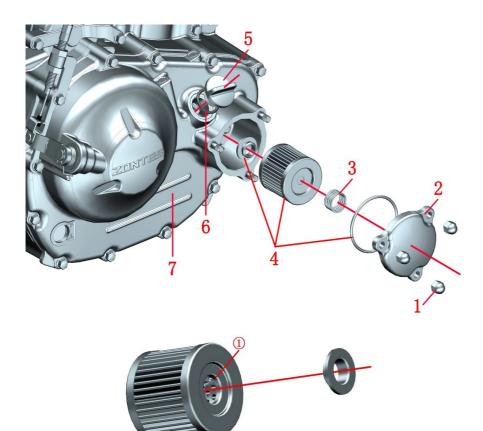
RIGHT CRANKCASE COVER ASSEMBLY		ZT158MJ right crankcase cover assembly-1	CHK	(0)
